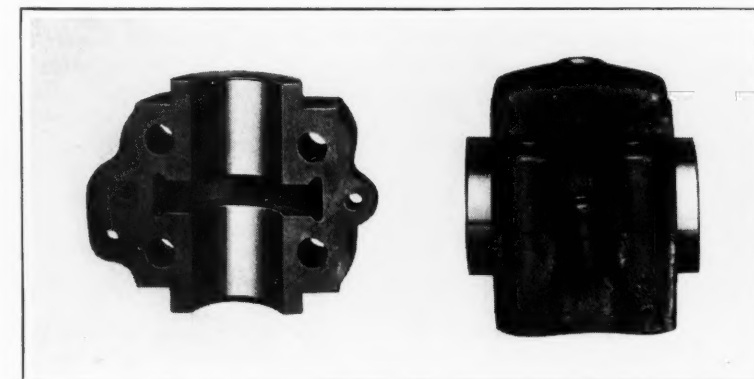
Bearing Finished by the Automatic Machine Shown in Fig. 1
